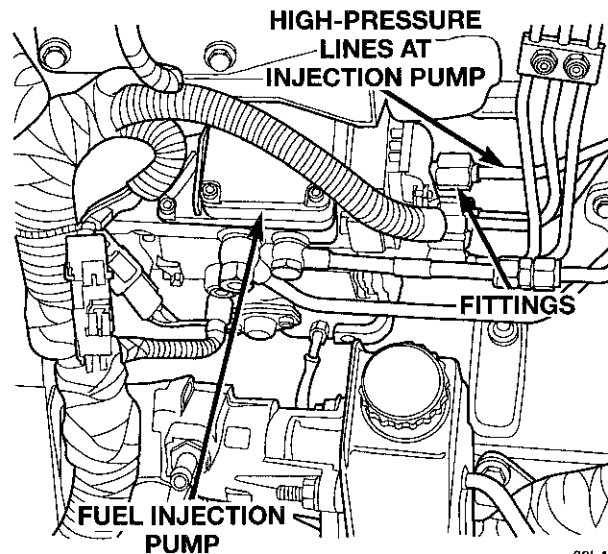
High-Pressure Lines at Fuel Injection Pump
